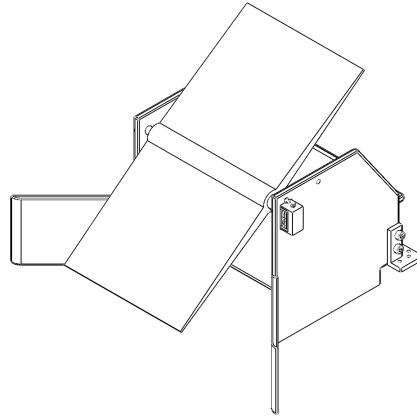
Drawing of Ramp and Paddle Sub-Assembly - [Engineering Drawing](#)
